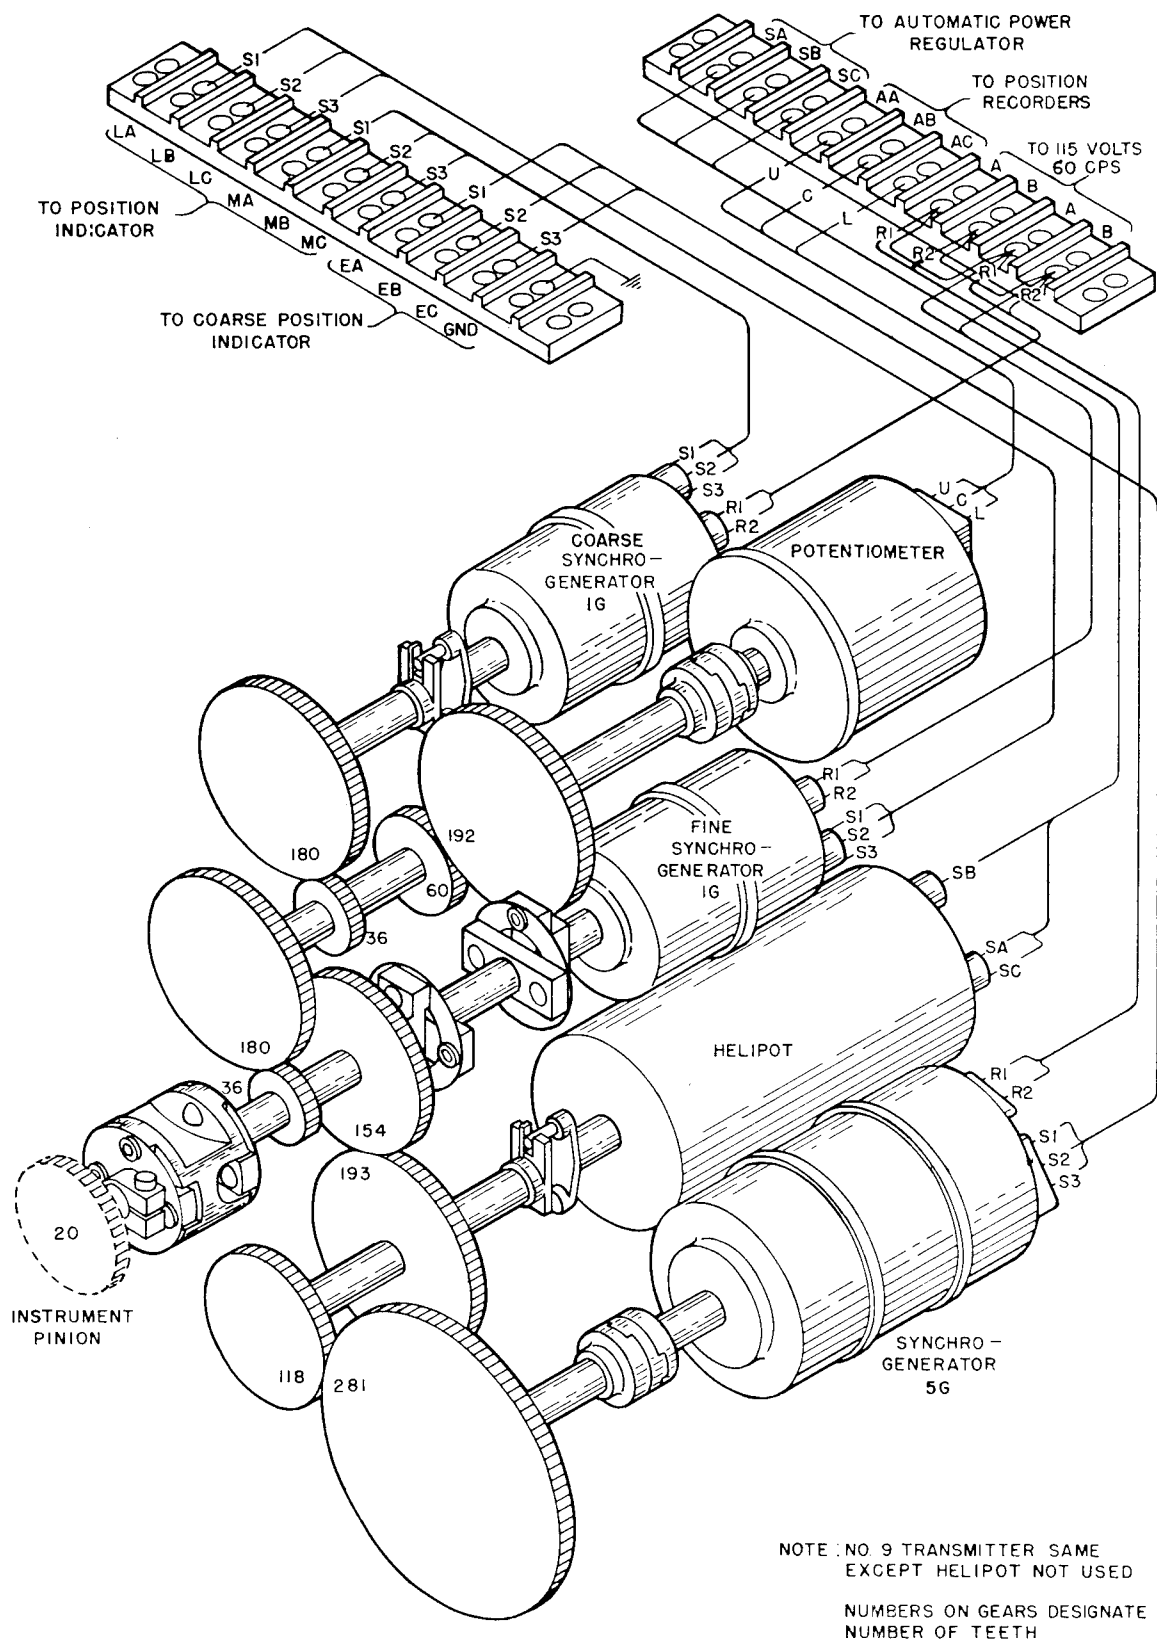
REGULATING-ROD POSITION TRANSMITTER - ROD NO. 15
